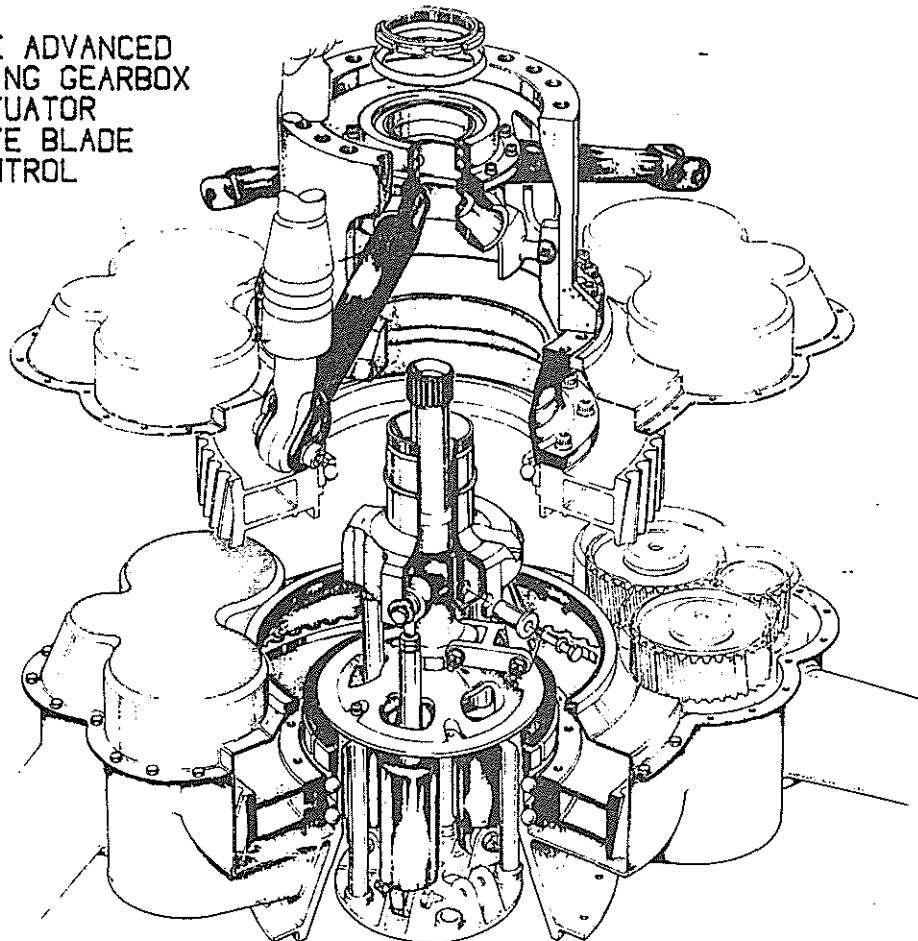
THE ADVANCED ENGINEERING GEARBOX AND 5-ACTUATOR SWASHPLATE BLADE PITCH CONTROL SYSTEM
